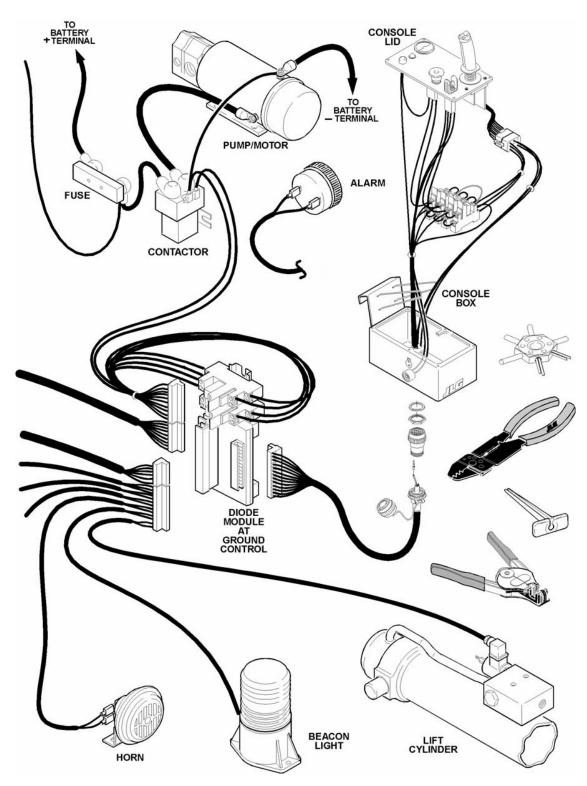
Harness and Cable Assembly - Non Proportional Control (Sheet 2 of 2)
